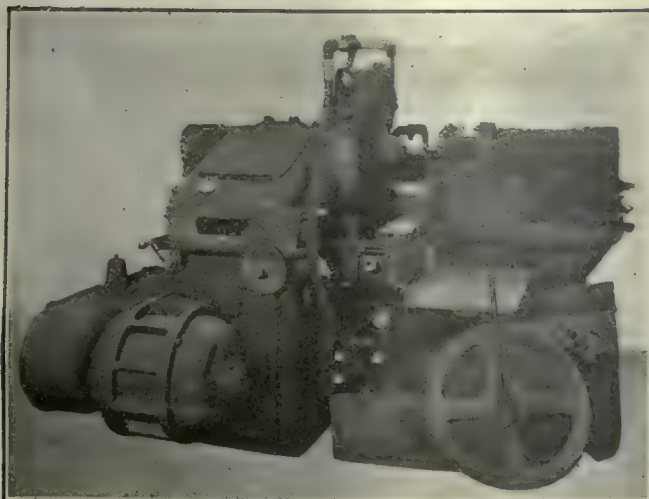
REAR VIEW OF MODEL 81-B MACHINE
